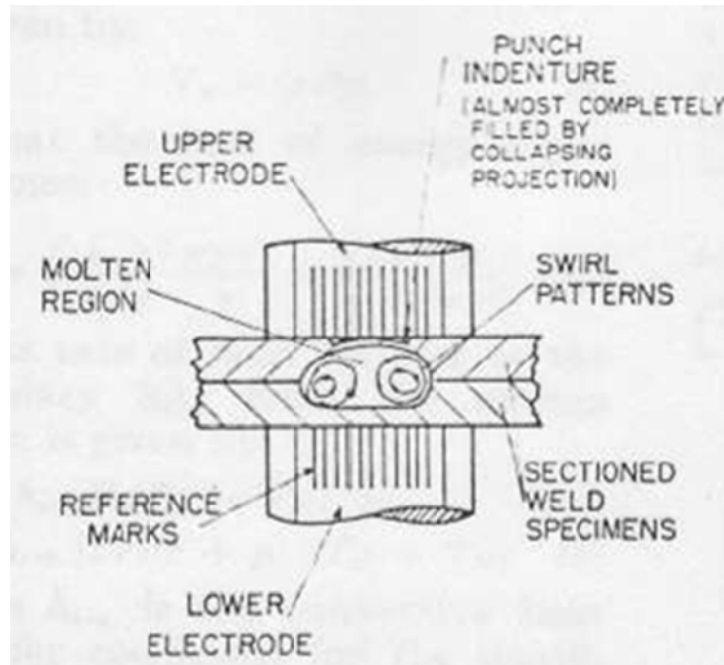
Electromagnetic stirring in weld nugget [80]
